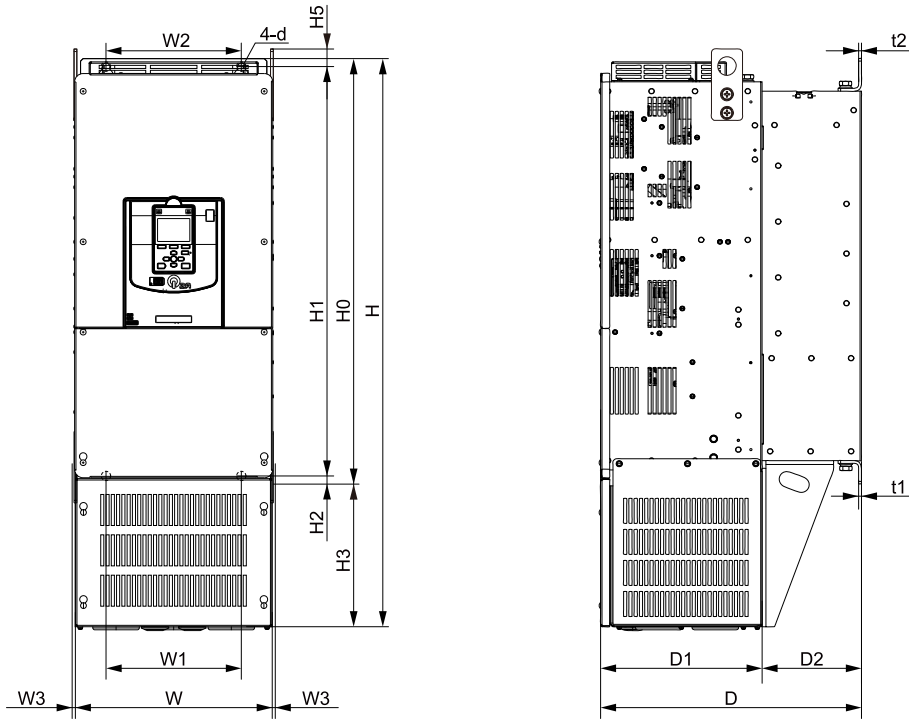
Exterior and Mounting Dimensions Diagram 7
